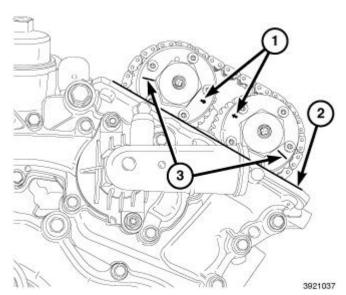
Arrows, Scribe Lines & Cylinder Head Cover Mounting Surface Courtesy of CHRYSLER GROUP, LLC
